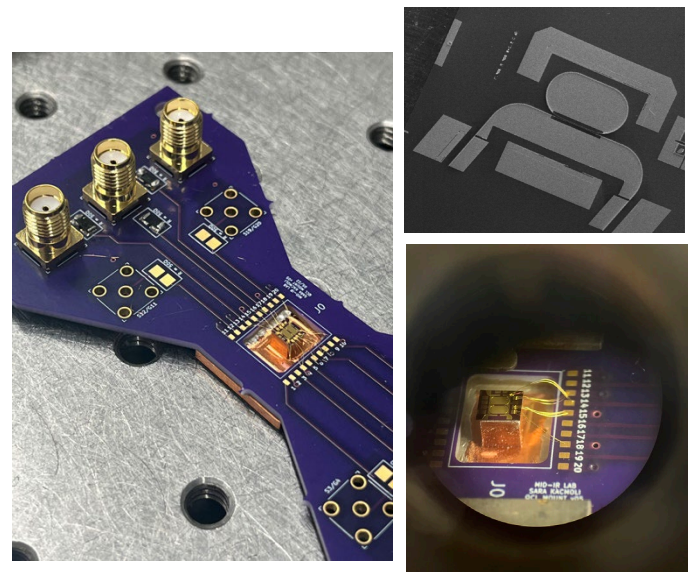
Packaging of the mid-infrared quantum cascade laser-based system. Left: Custom made high-frequency PCB. The device is mounted on a copper mount with silver epoxy and wire bonded to gold electrodes using a ball bonder. Bottom right: A magnified view of a partially wire bonded device. The device sits on a "pedestal" to allow detection of the emitted signal. Top right: SEM of one "unit" of the system ready for mounting once cleaved. It is comprised of a laser, active waveguide and two integrated photodetectors. The image shows the device after metallization.
